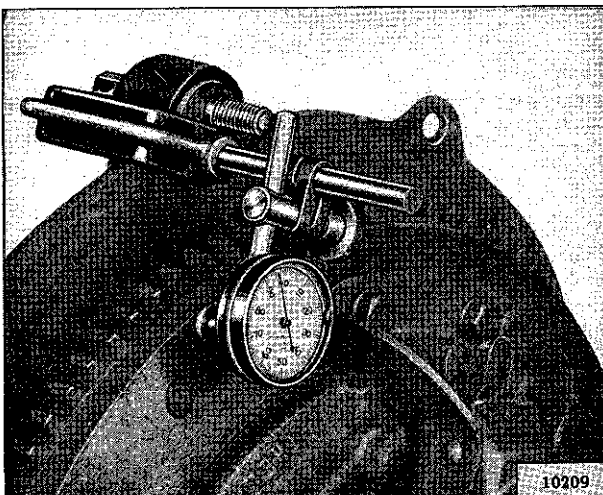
CHECKING FLYWHEEL RUN-OUT
